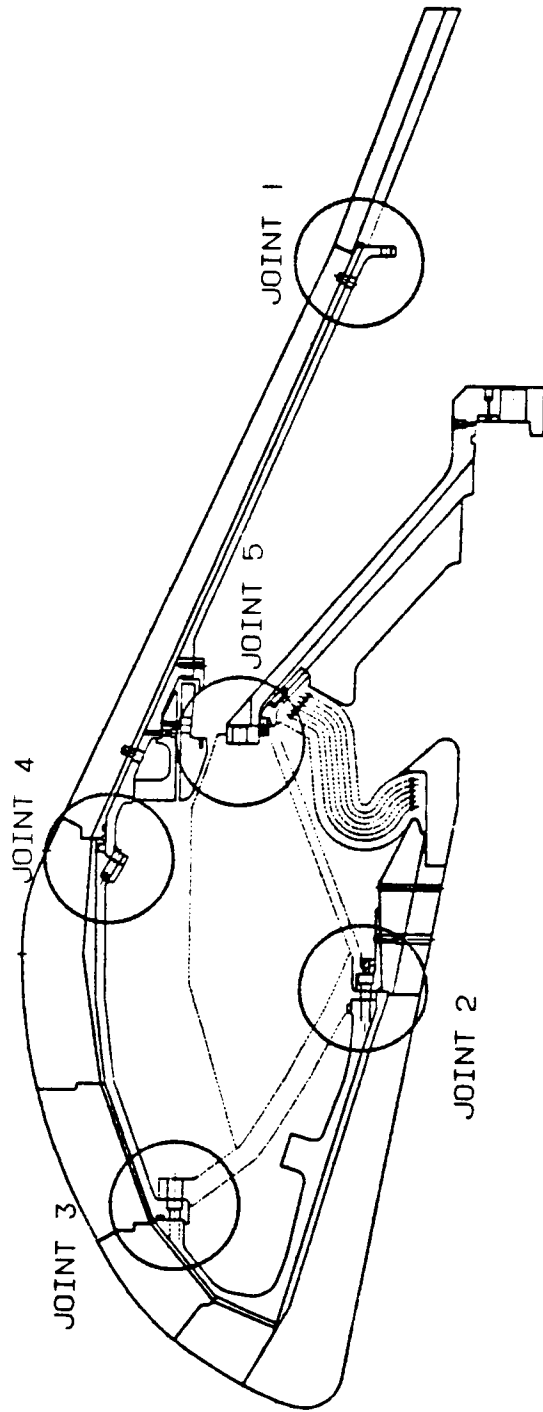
SRM NOZZLE SUBASSEMBLY JOINTS.
